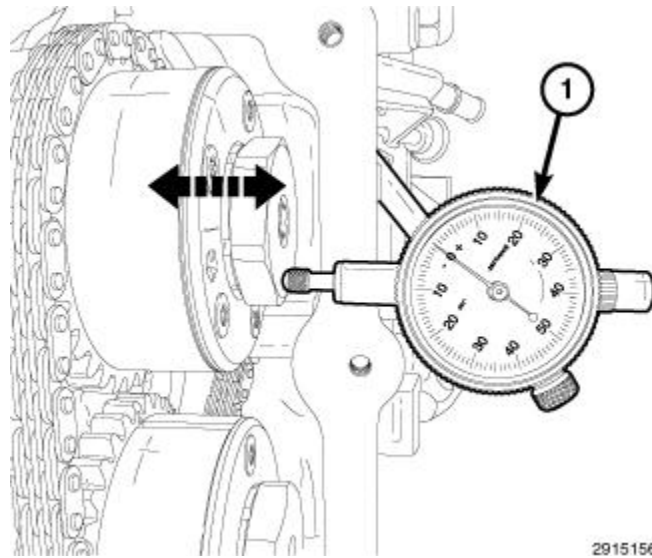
Mount Dial Indicator Set To A Stationary Point At Front Of Engine
